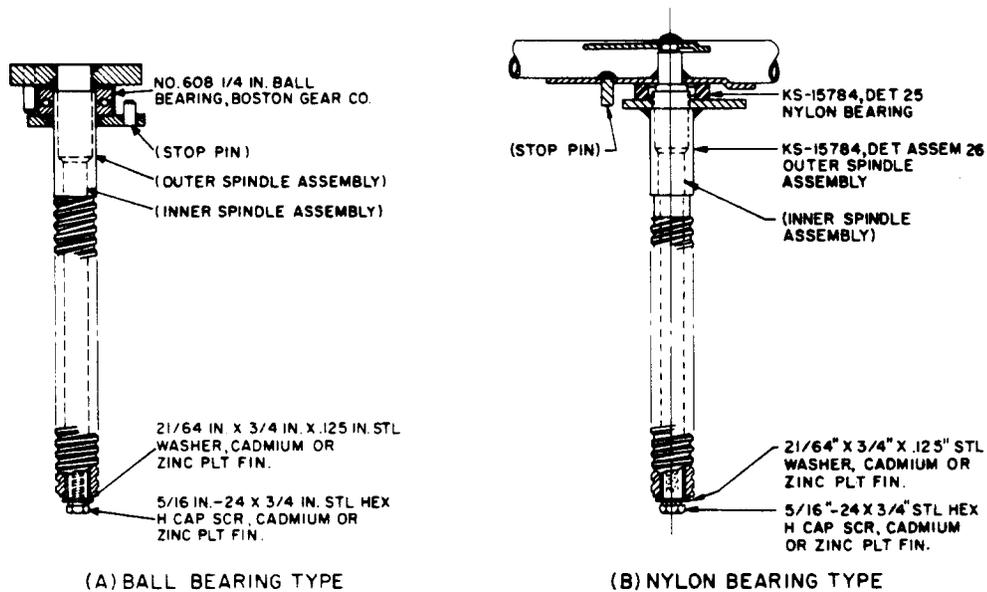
Stop-Pin-Type Spindle (Offset Spindle Chairs Only)
